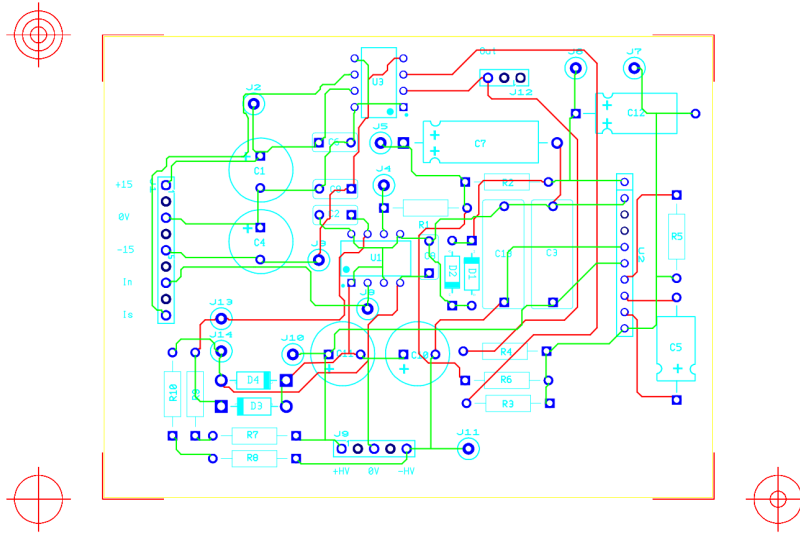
The PCB board design for the High Voltage Op-Amp module.
